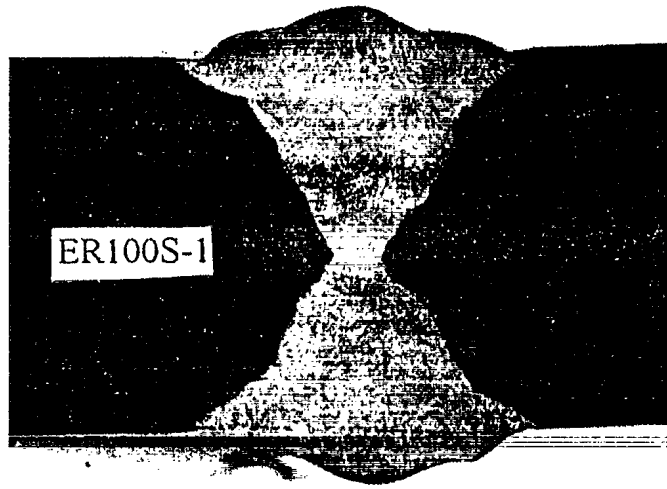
Photomicrograph of the Cross Section of the Weld Made Using LA100 Solid Wire and TIME Gas
